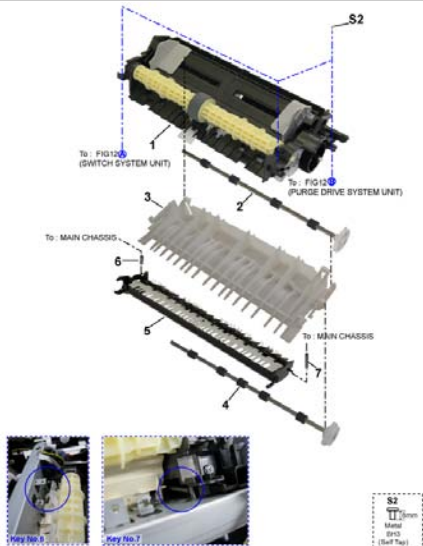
CARRIAGE UNIT & PRESSURE ROLLER UNIT
